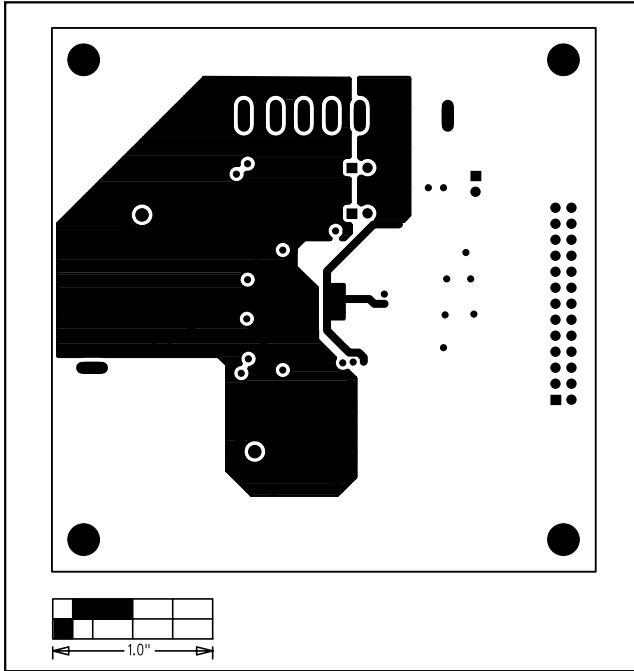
MAX1420 EV Kit PC Board Layout—Inner GND Layer
